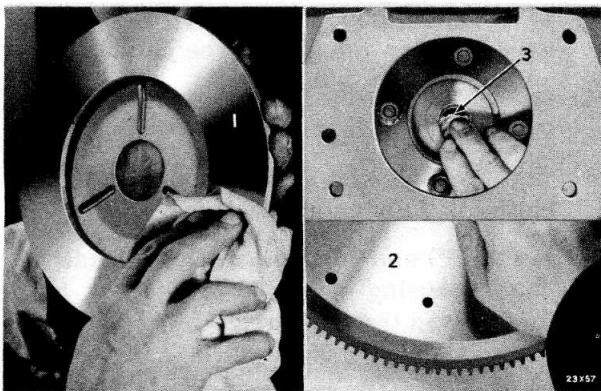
Cleaning Clutch Friction Surfaces and Lubricating the Pilot Bushings
